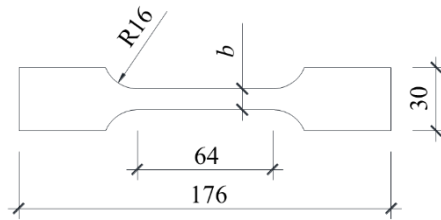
Basic dimensions of coupon specimen [mm].
